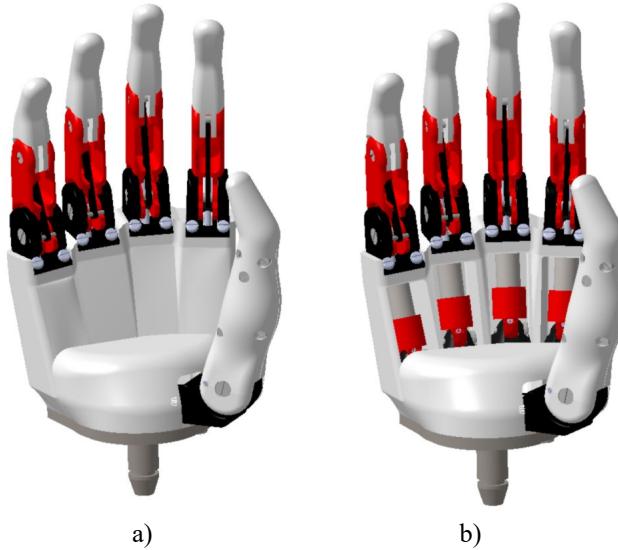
a) A global view of the overall design of the exoprosthetic hand, b) DC motors positioning details
